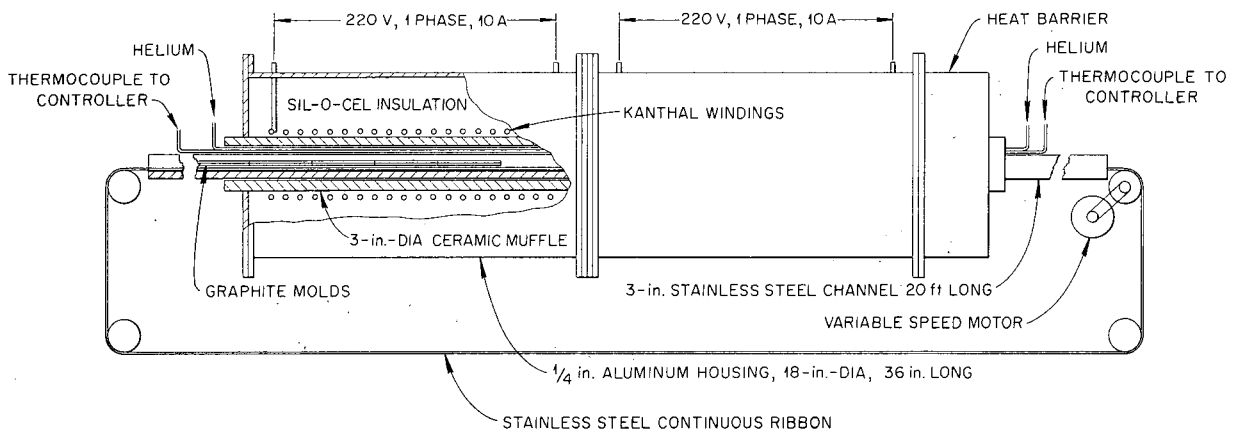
Continuous Furnace for Production of Sintered CM-52 Brazing Rings.
